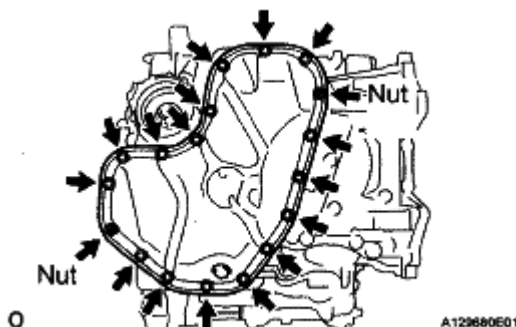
Identifying No. 2 Oil Pan Bolts & Nuts
